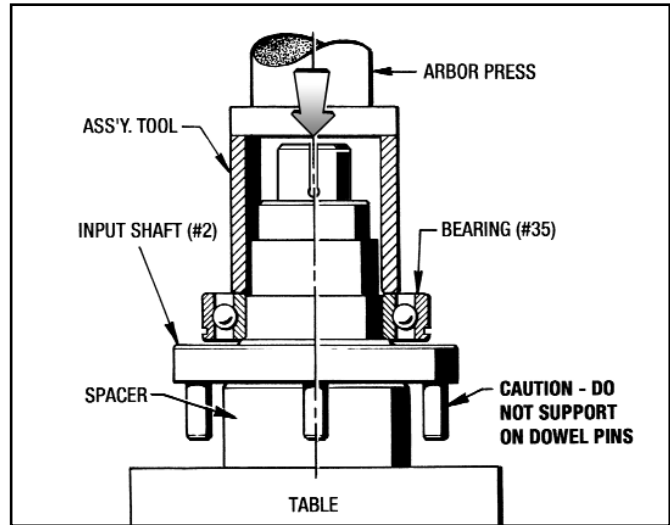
Installing Bearing (#35) on Quill Shaft
